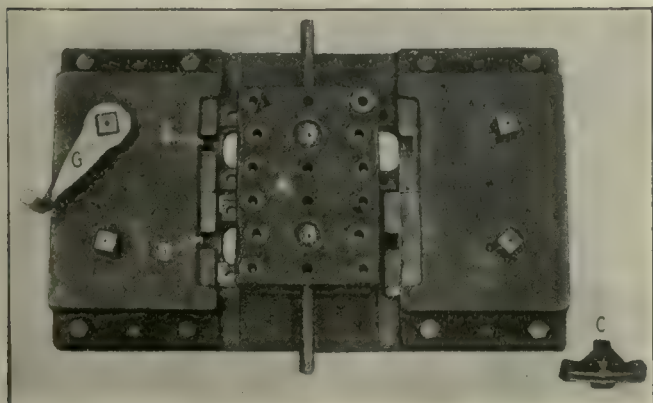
DRILL JIG FOR CLUTCH BOSS
